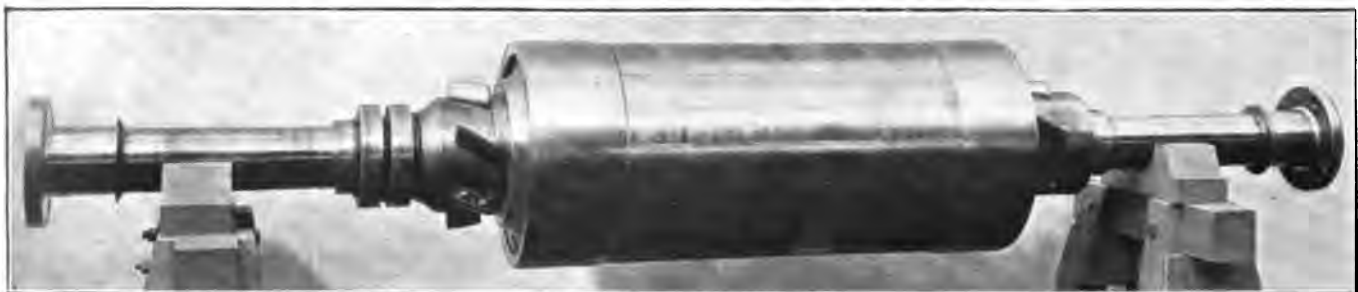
COMPLETE ROTOR OF A. E. G. TURBO-ALTERNATOR
